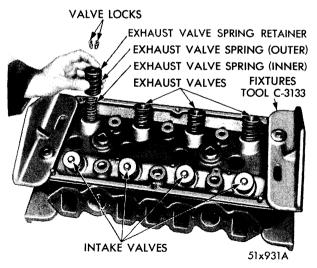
Installing Inner and Outer Exhaust Valve Springs and Retainers
